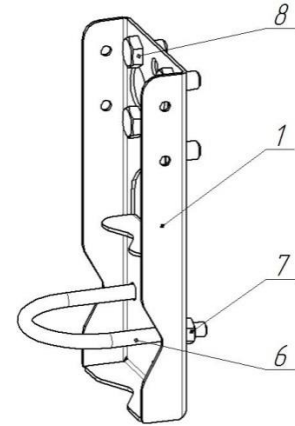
Steel horizontal bracket. Mounting kit type 2
